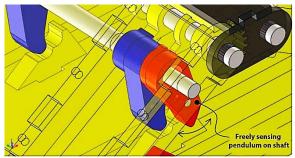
Zoom in to the sensing mechanism separated from locking mechanism.
